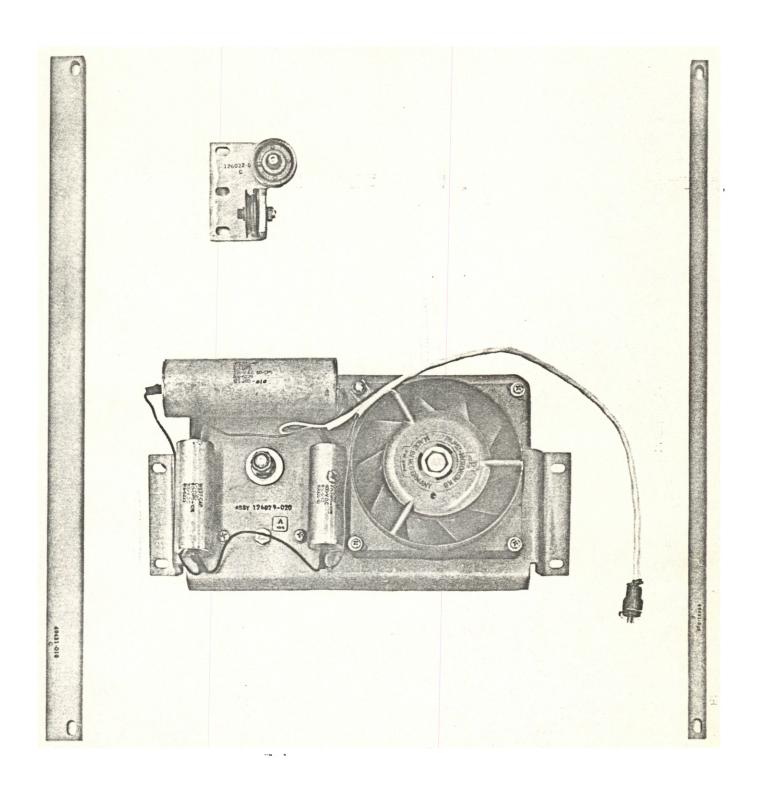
CP-100 RACK MOUNT ADAPTOR KIT
